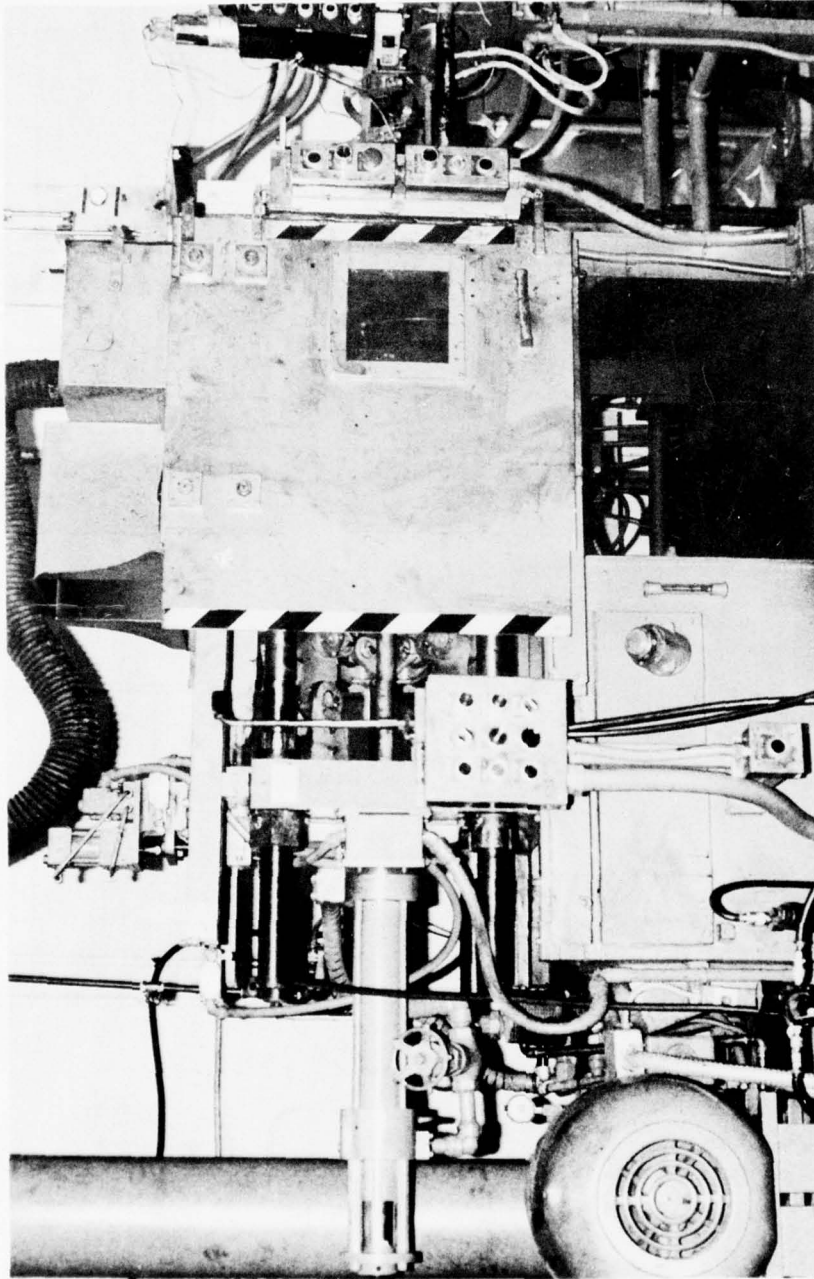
Photograph of the B&T Greenlee horizontal cold chamber die casting machine.
